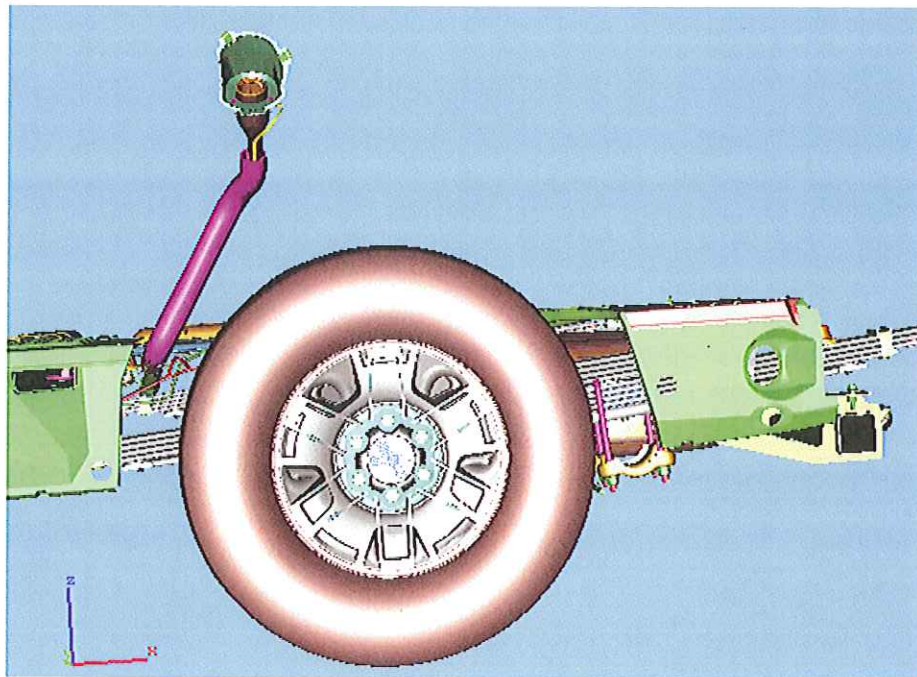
Cutaway view of the Fuel Filler Pipe Assembly
